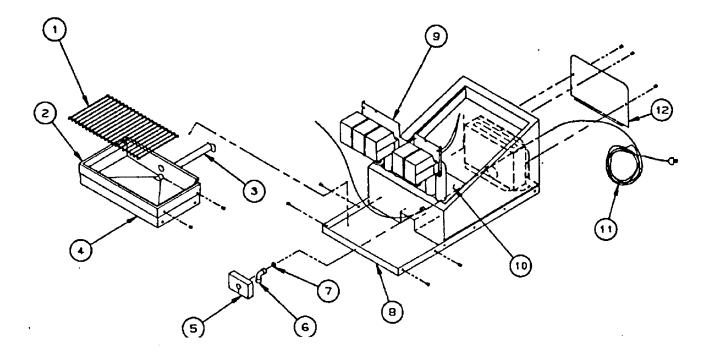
EXPLODED VIEW & PART LIST DB90-BC CABINET
